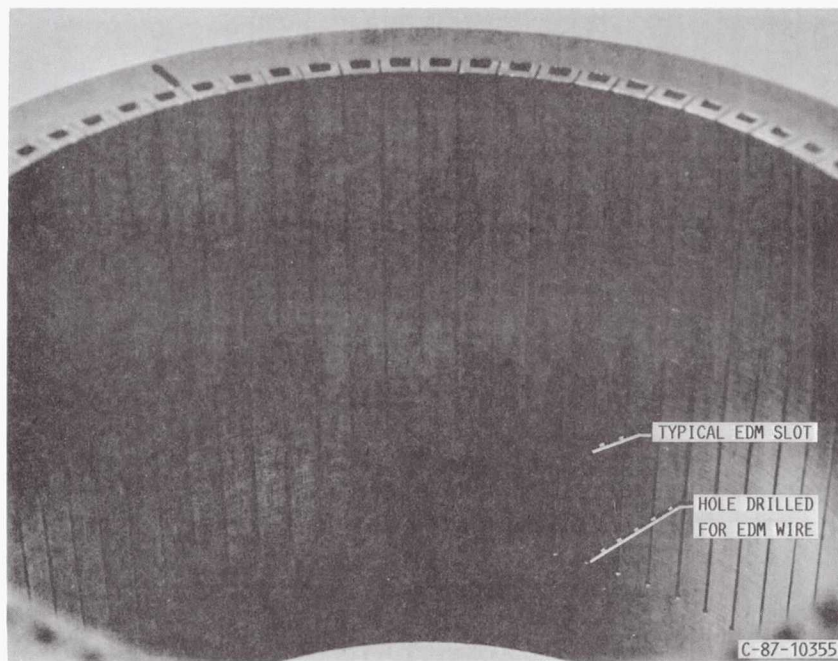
COMBUSTION CHAMBER LINER INCORPORATING ELECTRICAL DISCHARGE MACHINED (EDM) SLOTS.
